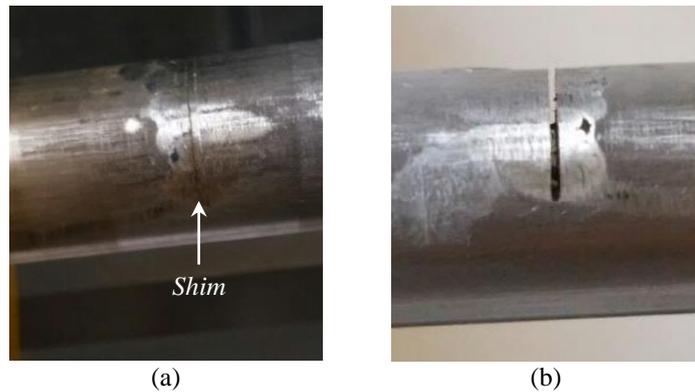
Crack conditions: (a) breathing crack; (b) open crack.
